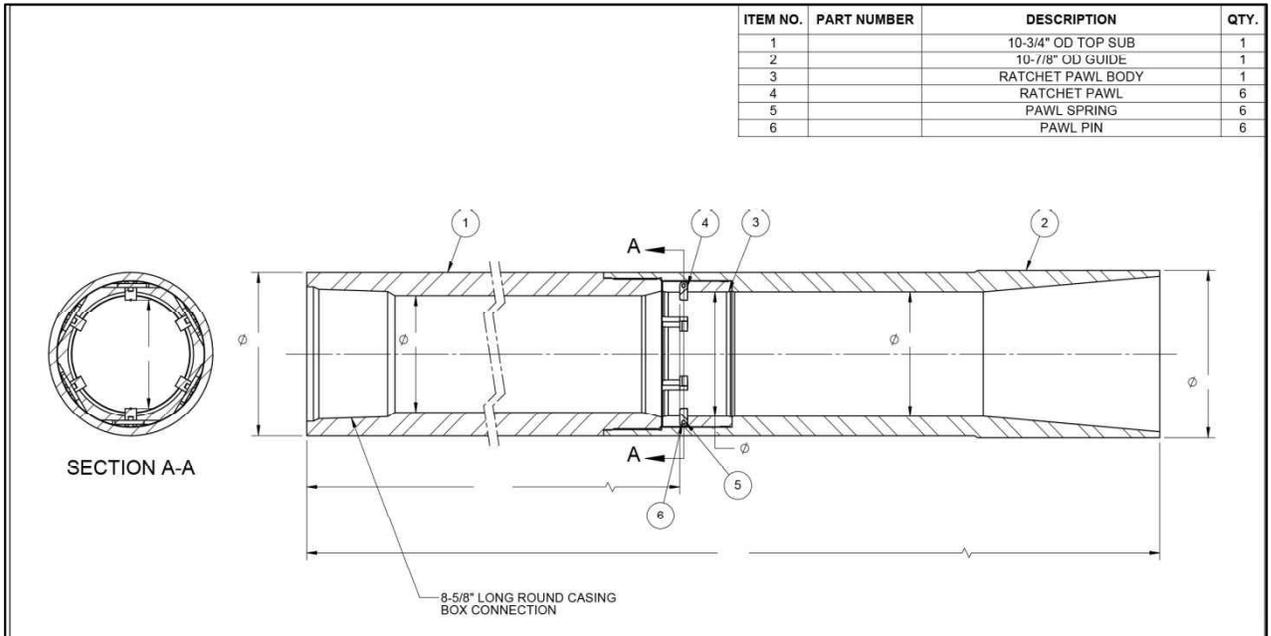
Layout Drawing of NOV Ratchet Pawl Casing Extraction Tool
